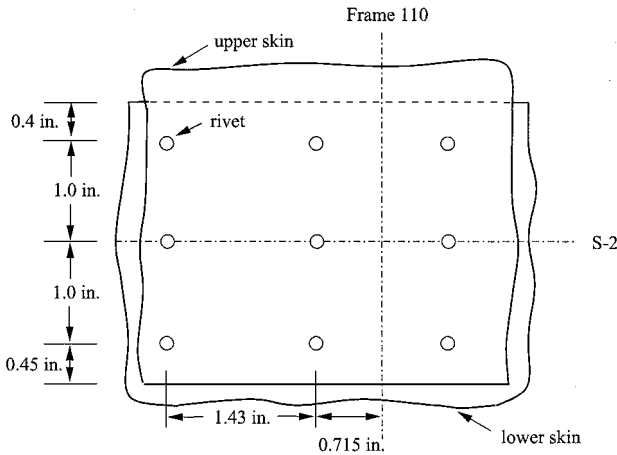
Detailed rivet spacing for the KC-135 fuselage panel.
